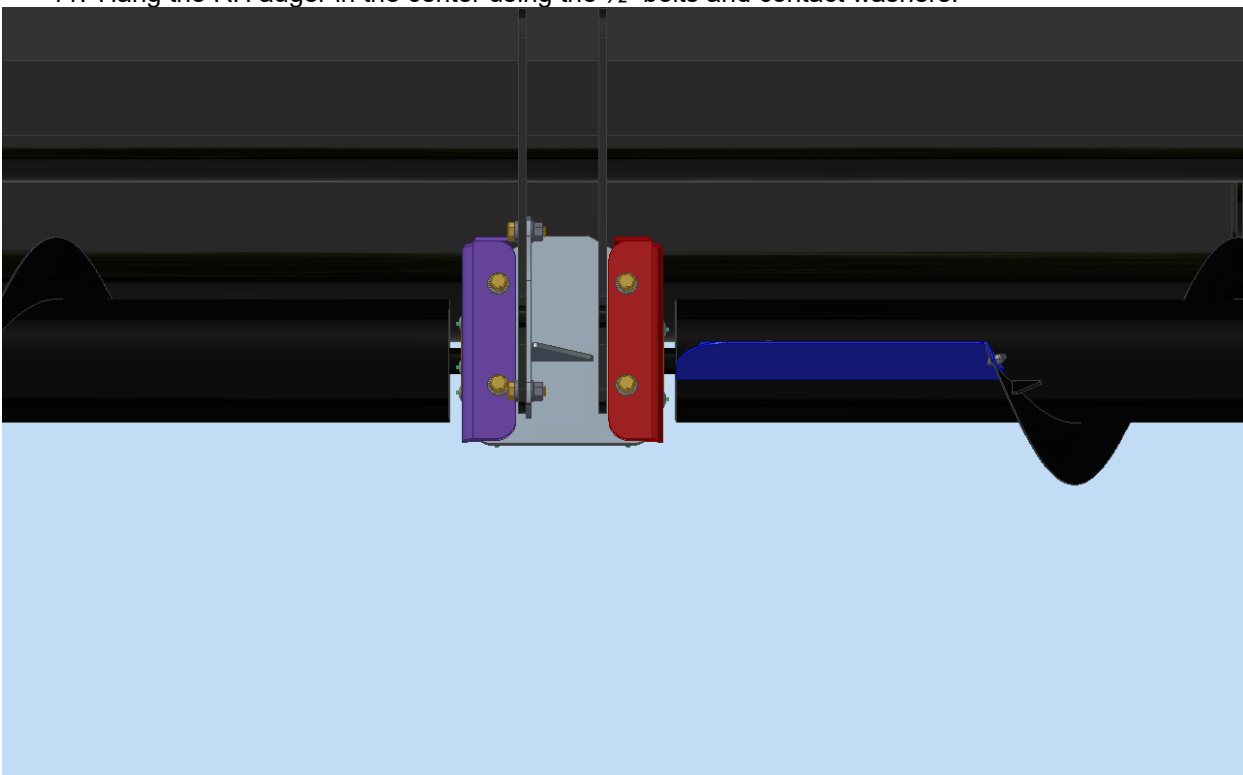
RH AUGER MOUNTED ON CENTER MOUNT TOP VIEW
